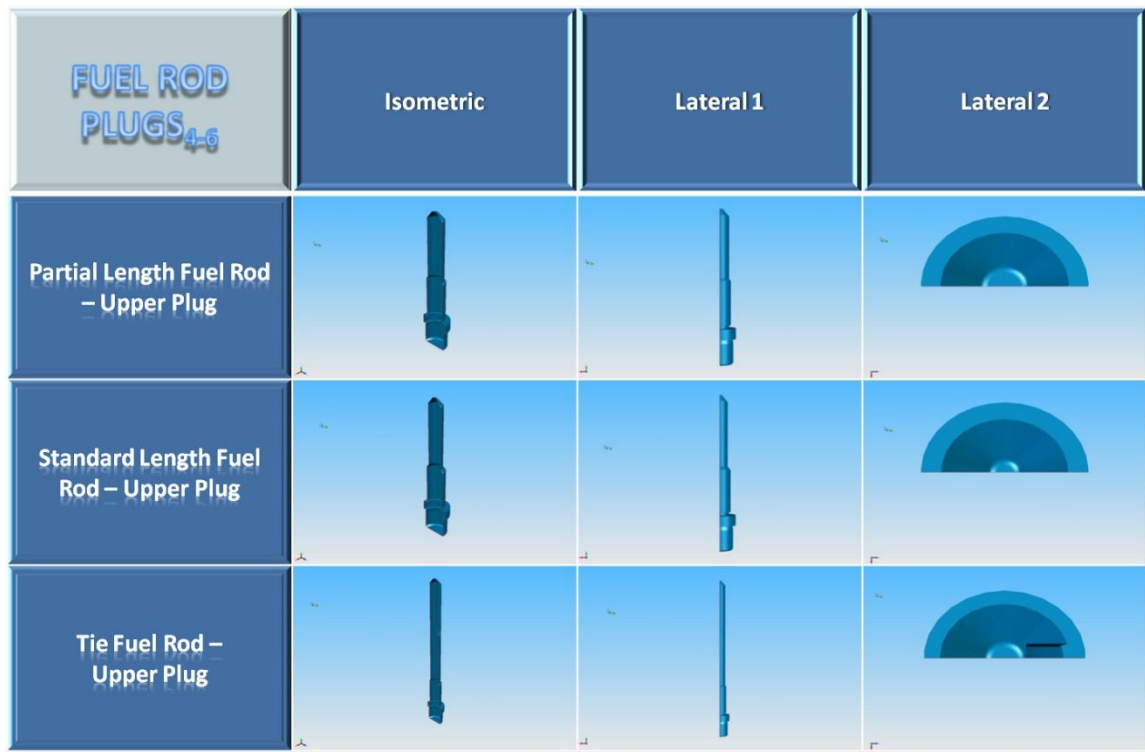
CAD solid models of upper plugs for all fuel rod types.
